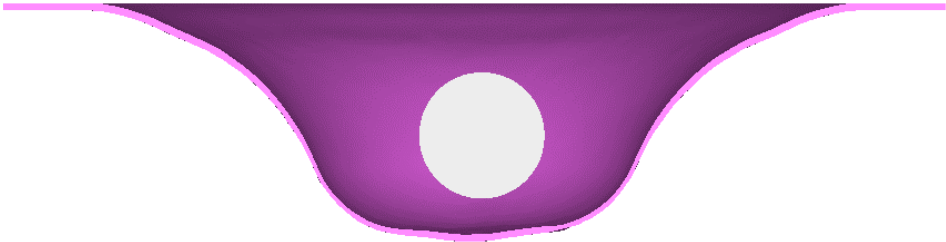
Final geometry of a SPIF formed AISI304 sheet with a 20 mm diameter tool
